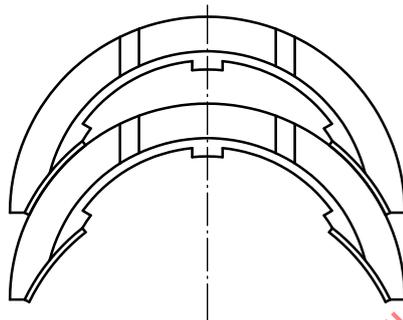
Type of transition between half bearing and flange of an assembled flange bearing
